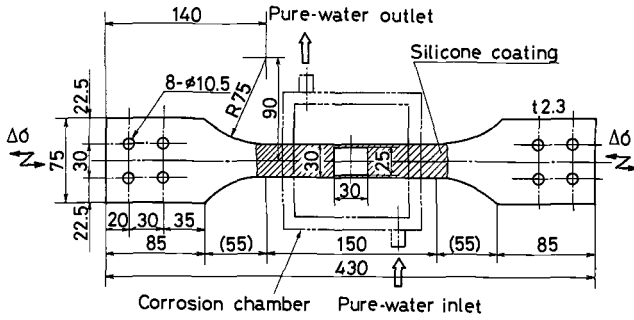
Corrosion fatigue specimen geometry, in millimetres.
